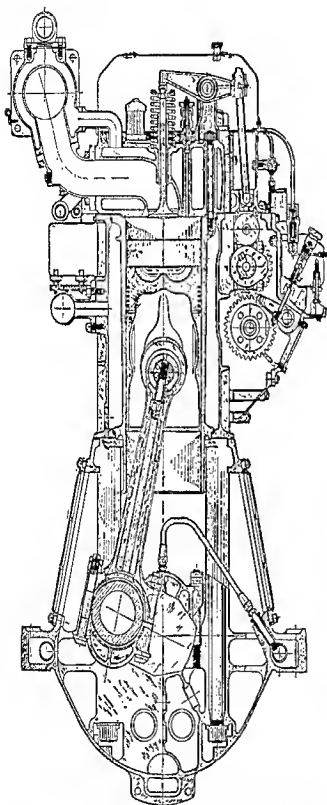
Cooper-Bessemer four-cycle trunk-piston engine.
